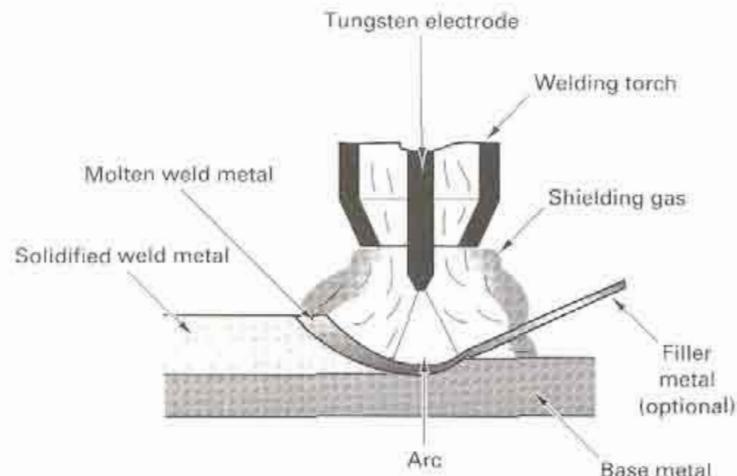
Diagram of gas tungsten arc welding (GTAW). (Courtesy of American Iron and Steel Institute, Washington, DC)
